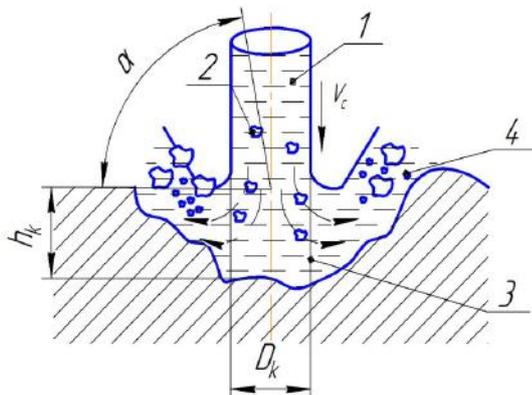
Scheme of leakage hydroabrasive jet on the workpiece material:
